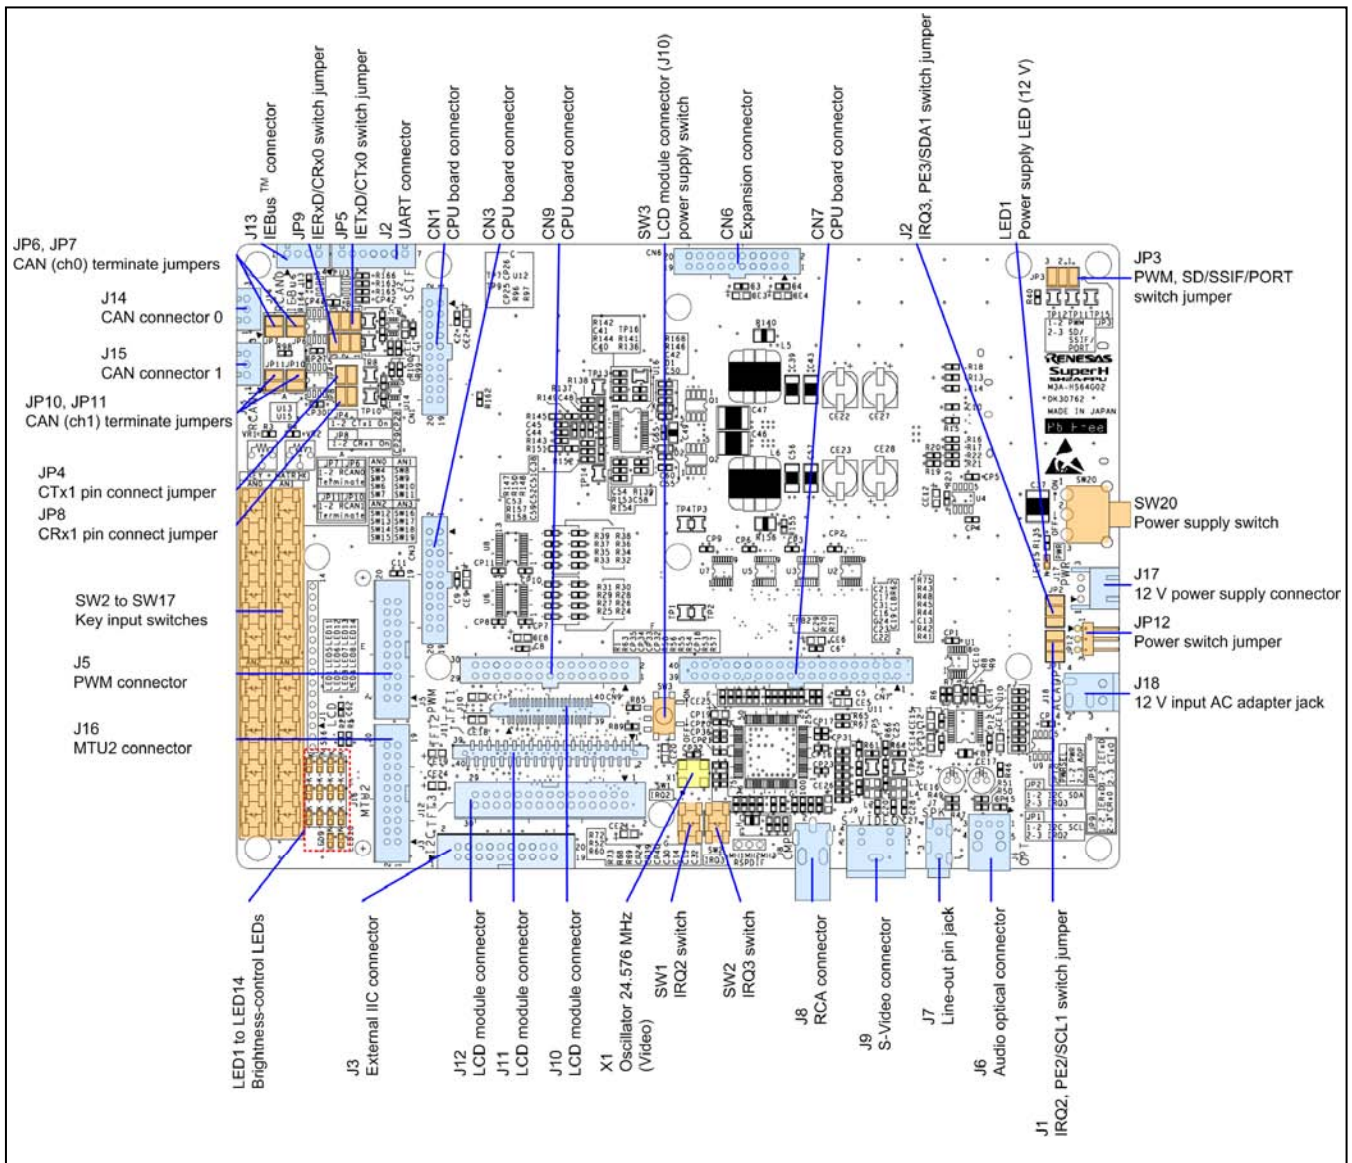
M3A-HS64G02 Layout and Component Placement (Top View of the Component Side)
